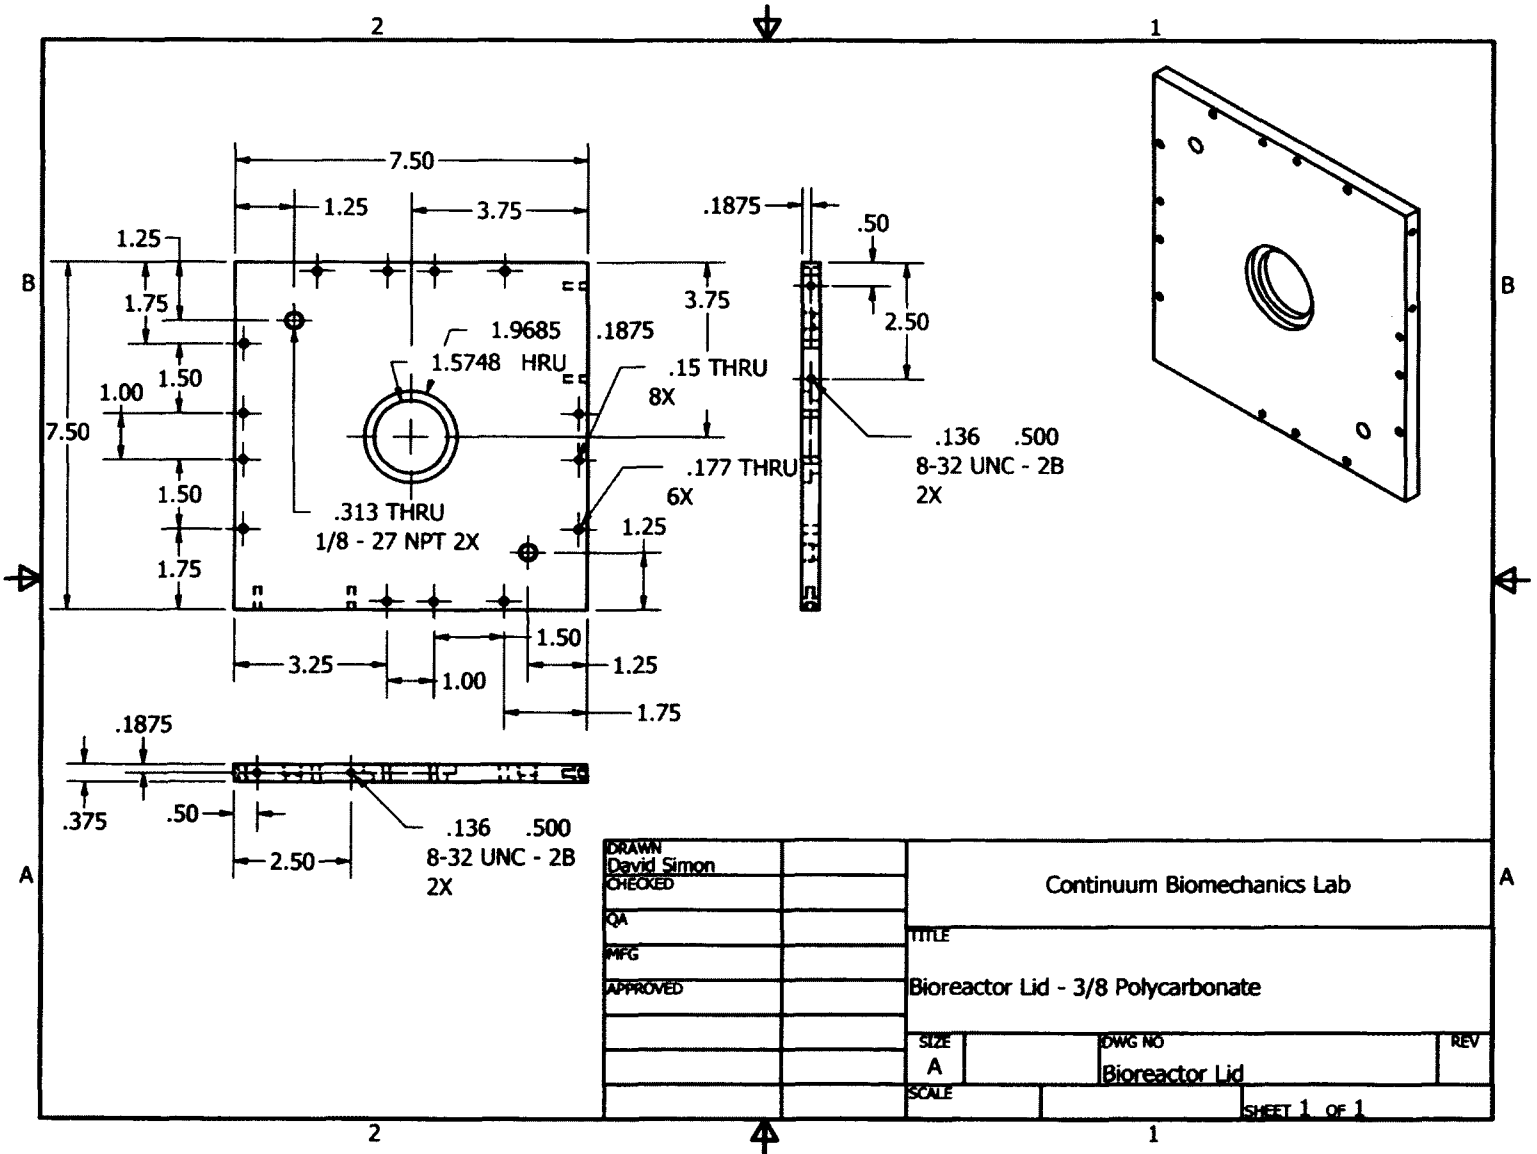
Bioreactor chamber technical drawing. Units are in inches.
